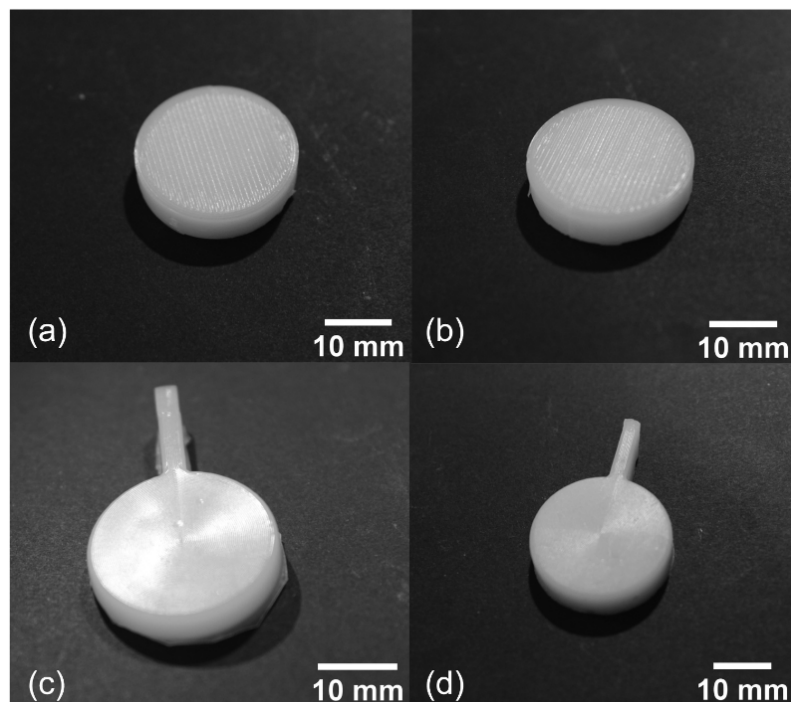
Images of the samples (25-mm diameter and 4-mm thick) showing (a) printed HDPE, (b) printed PCM42/HDPE composite, (c) molded HDPE, and (d) molded PCM42/HDPE composite.
